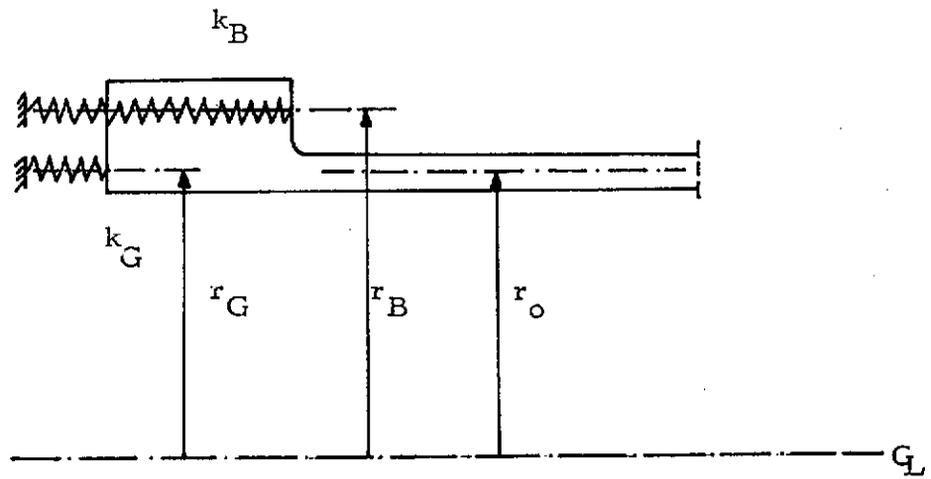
Gasket and Bolts Modeled as Springs
